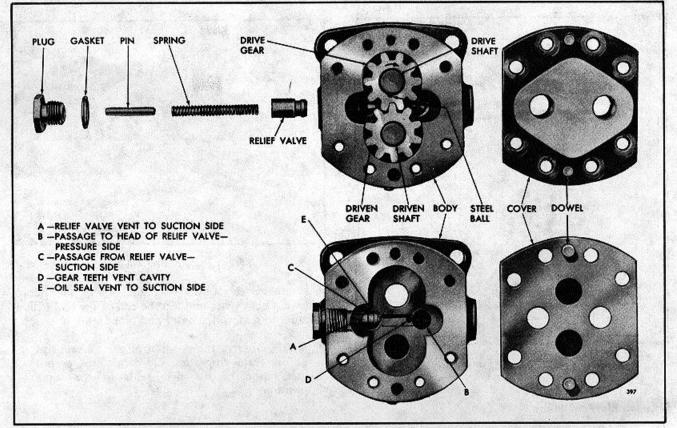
Fuel Pump Valving and Rotation (Right-Hand Pump)
